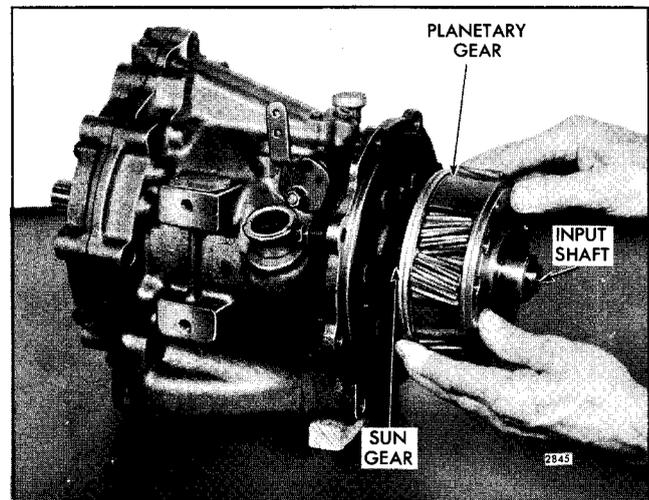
Removing or Installing Reduction Gear Planetary Gear Assembly from/on Sun Gear and Input Shaft (2.1:1 Ratio)
